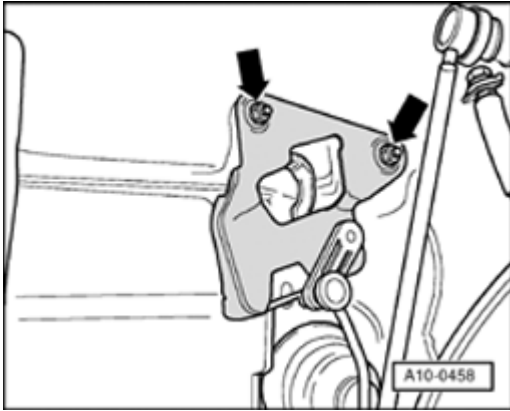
Unbolting Bracket For Headlight Range Control In Left Wheel Housing
